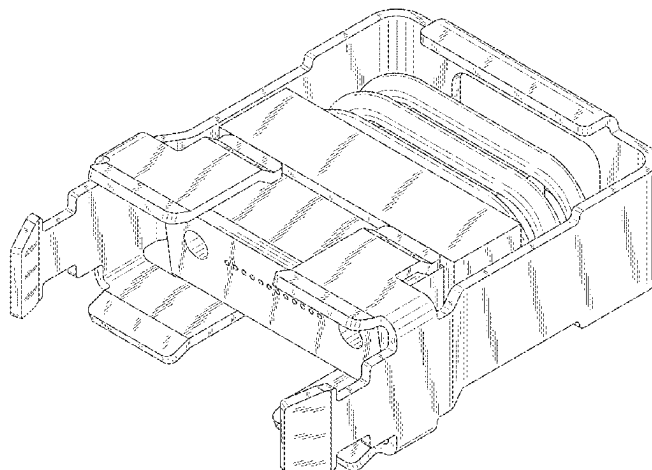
is a rear, bottom plan and right side perspective view of the optical fiber connector of FIG. 1;
